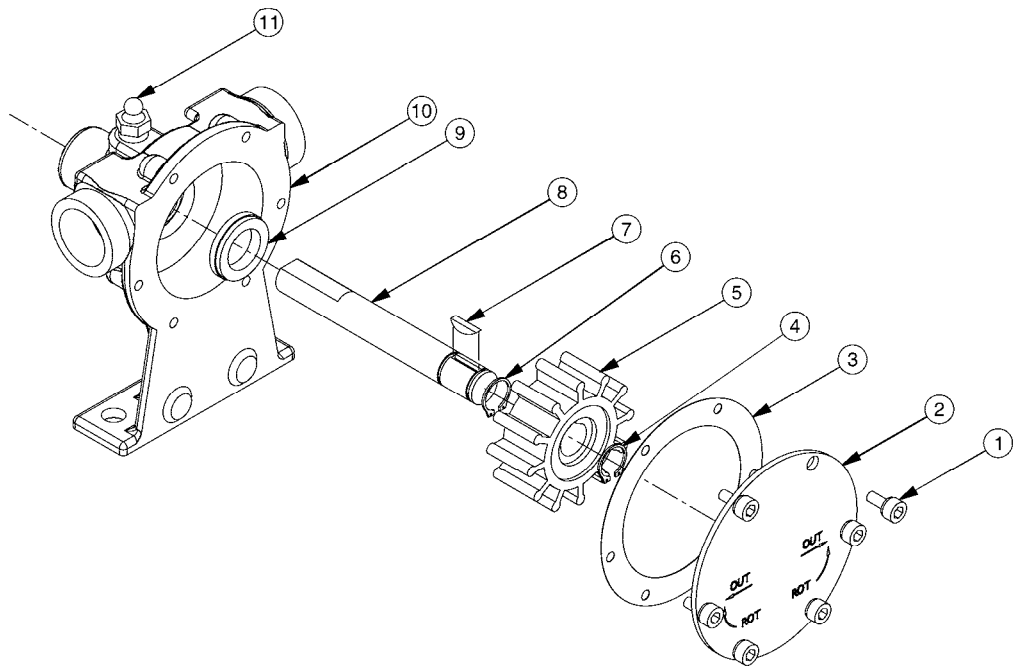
Exploded view of the Flexible Impeller Pump.
